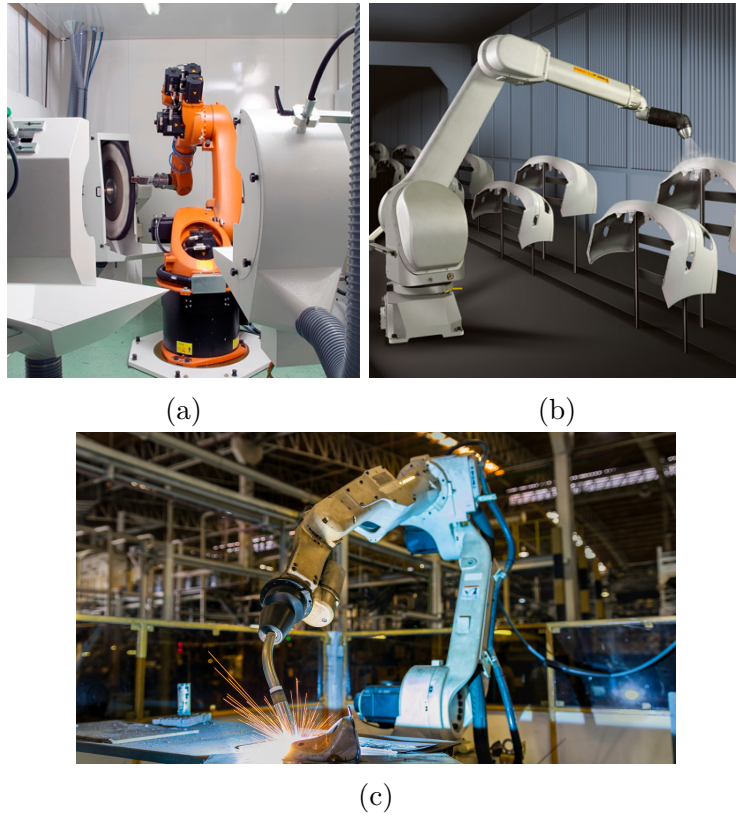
Examples of industrial robot applications (a) Polishing robot[89] (b) Painting robot[87] (c) Welding robot[90]
